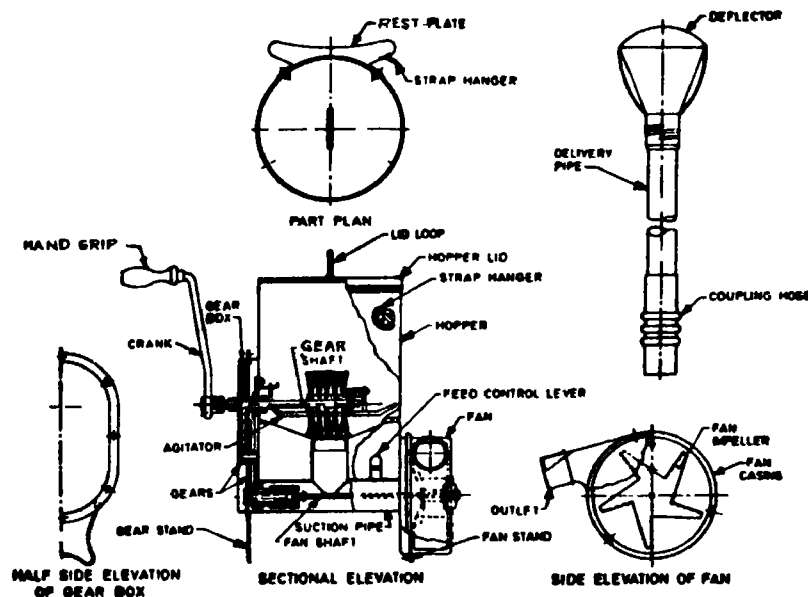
A TYPICAL HAND ROTARY DUSTER, BELLY-MOUNTED TYPE
